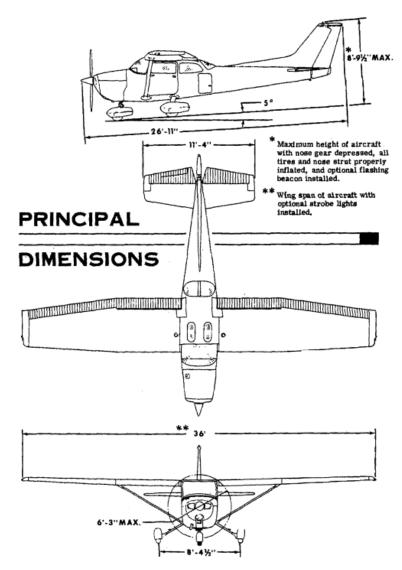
Principal dimensions of a Cessna C172M
